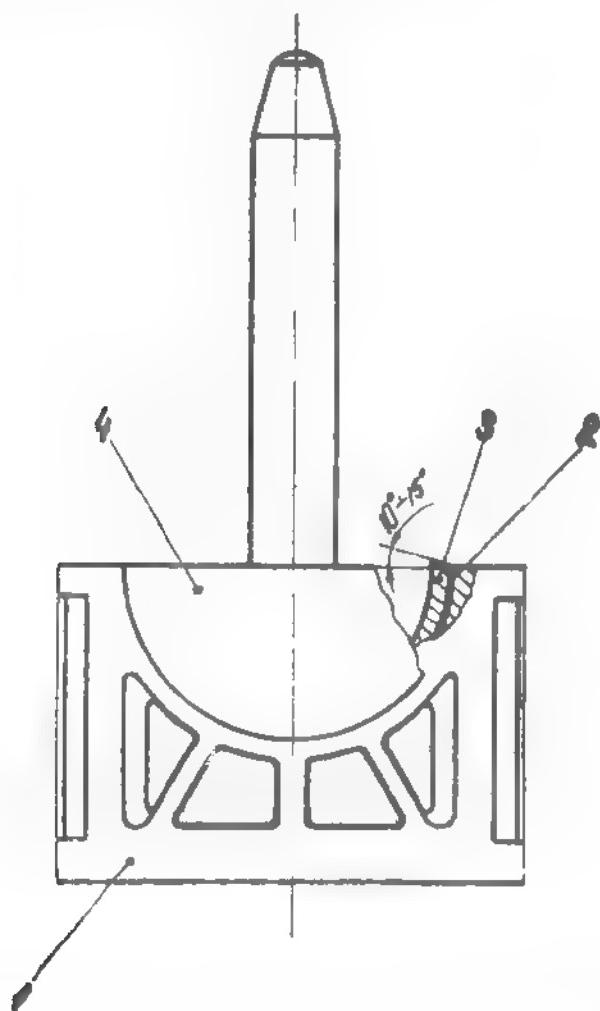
INSERTING PACKING HALF-RINGS, BY MEANS OF S-16 DRIFT, IN THE REAR BEARING COVER.
